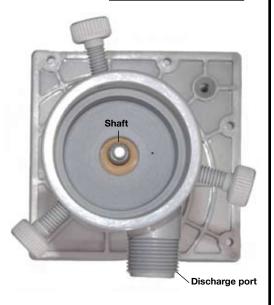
Looking down into Impeller Housing, make sure Shaft is approximately centered in hole, as shown.
